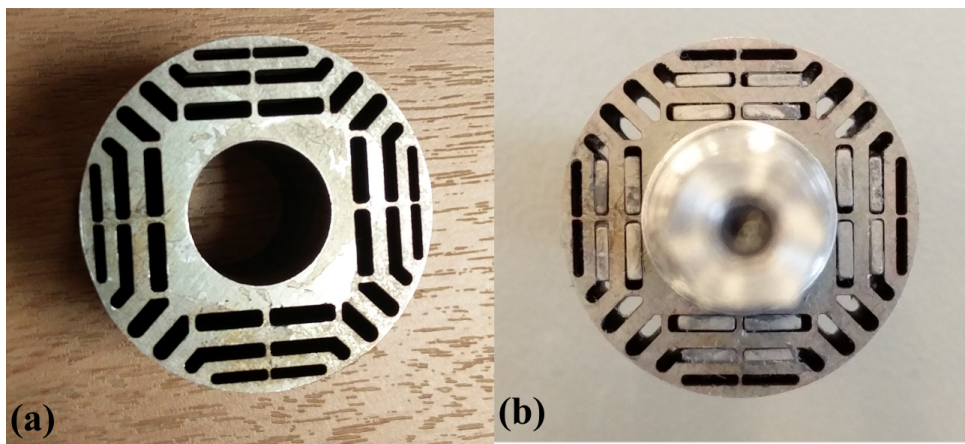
Top view of the rotor lamination stack before (a) and after (b) magnets and shaft insertion.
